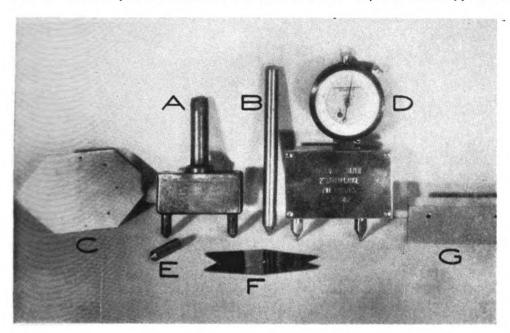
Special tools required for making punch marks on wheels and for measuring rosettes
